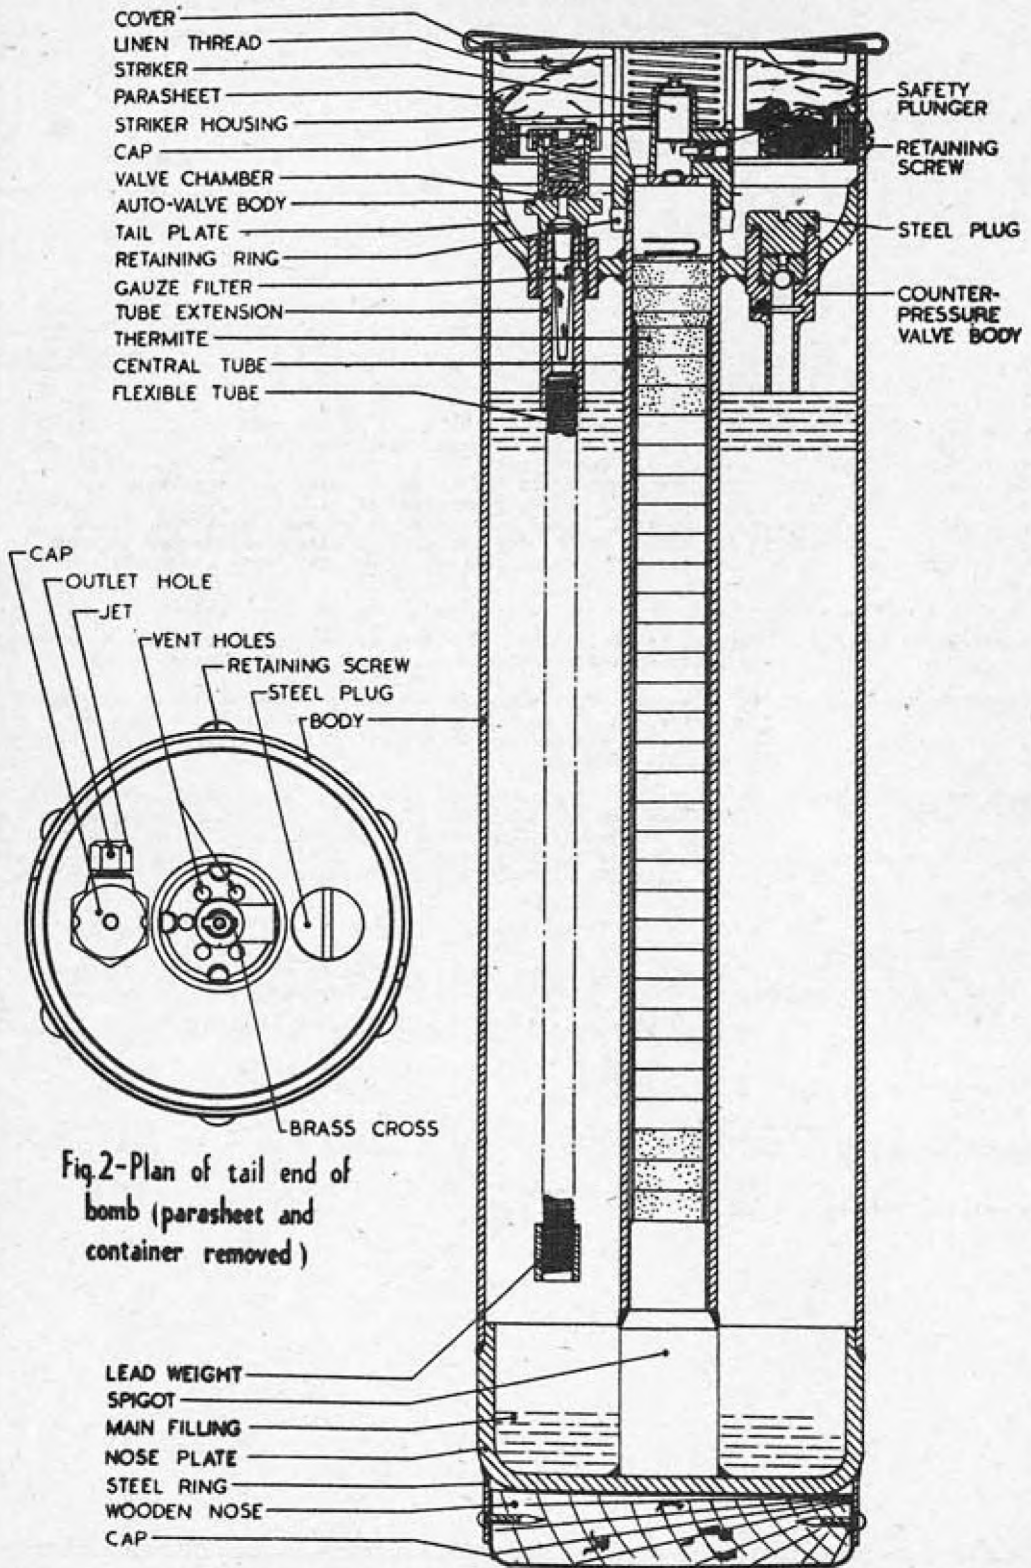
Plan of tail end of bomb (parasheet and container removed)
